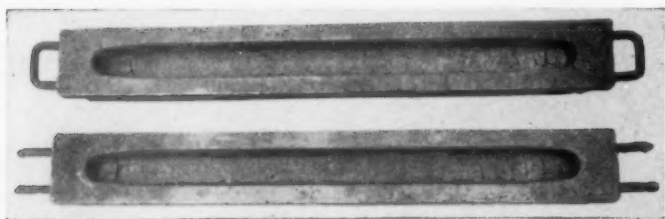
CHROMIUM CAST IRON INGOT MOLDS AFTER BEING USED FOR ABOUT 500 COPPER INGOTS.
